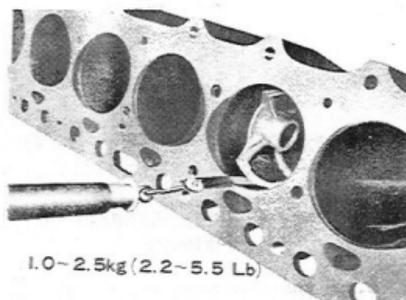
Measuring Piston V4351 to Cylinder Clearance
